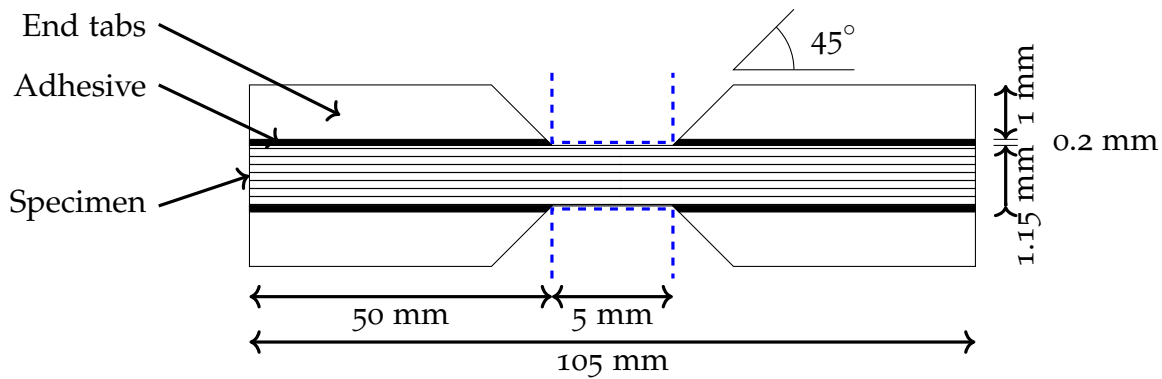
Schematic of the testing to failure specimen with adhesive and tabbing. The cross section A-A of the Fig. 5.1 indicates the viewing direction. The outline of the jig is represented by the blue dashed lines.
